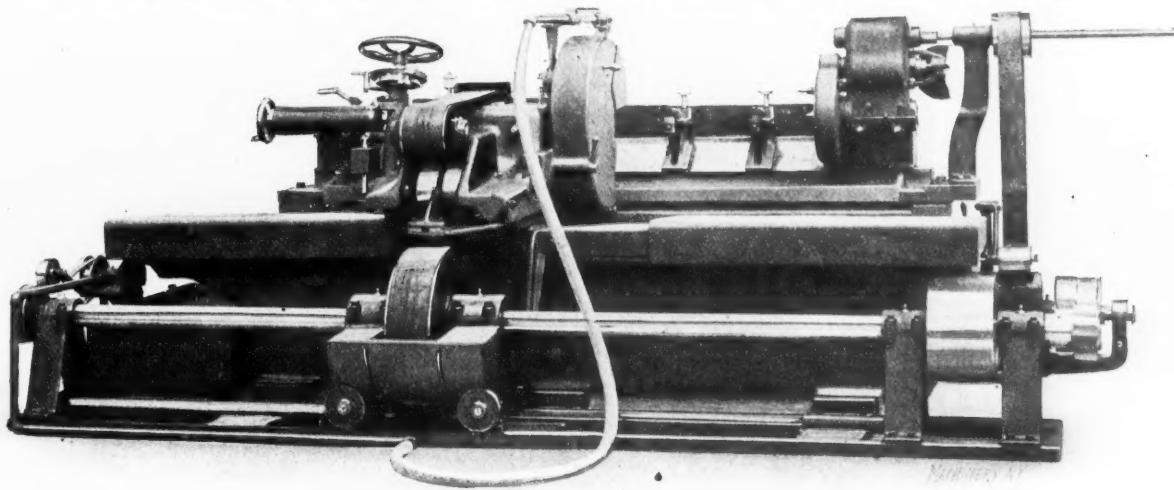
Rear View of Landis Grinding Machine, showing Self-contained Drive
